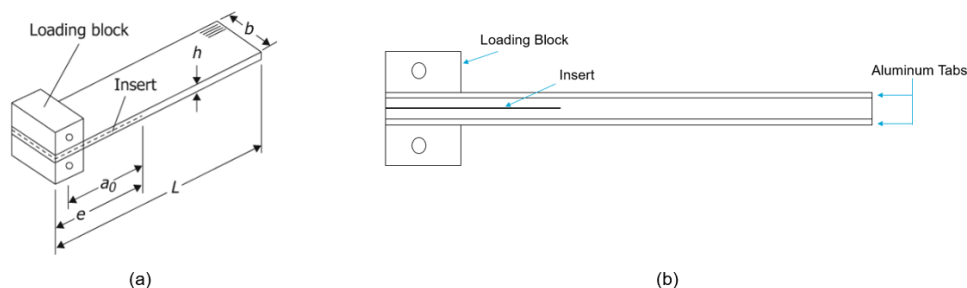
(a) DCB design according to ASTM 5528 [20] (b) Side view of the modified DCB design
